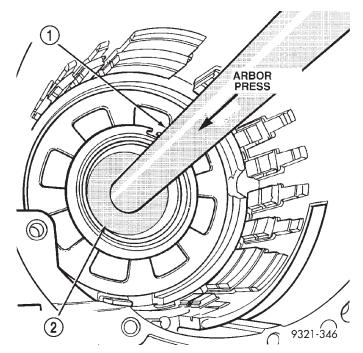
Remove Rear Bearing Cup 1 – SPECIAL TOOL 4171 AND 4171–2
